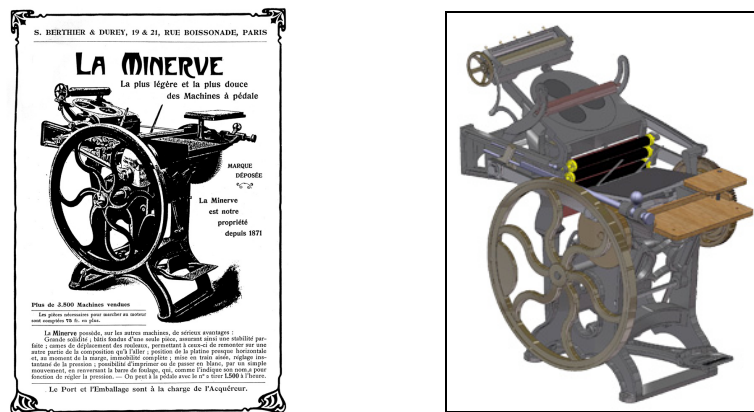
Printing press "La Minerve": manufacturer catalogue drawing & CAD model.
